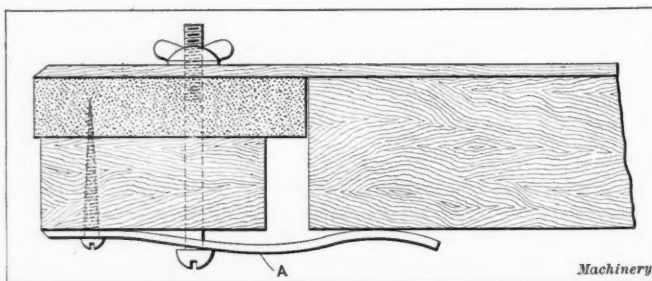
T-square held by Pressure of Clamp Spring on Under Side of Drawing Board
